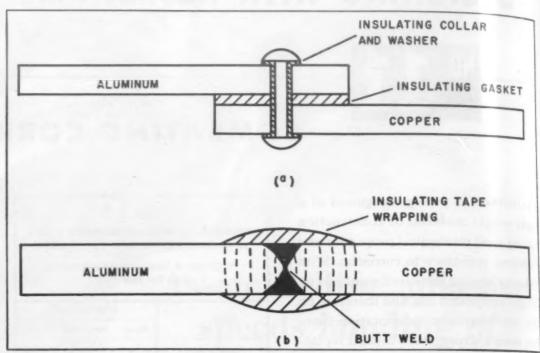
Methods of insulating dissimilar metals to prevent galvanic corrosion.
